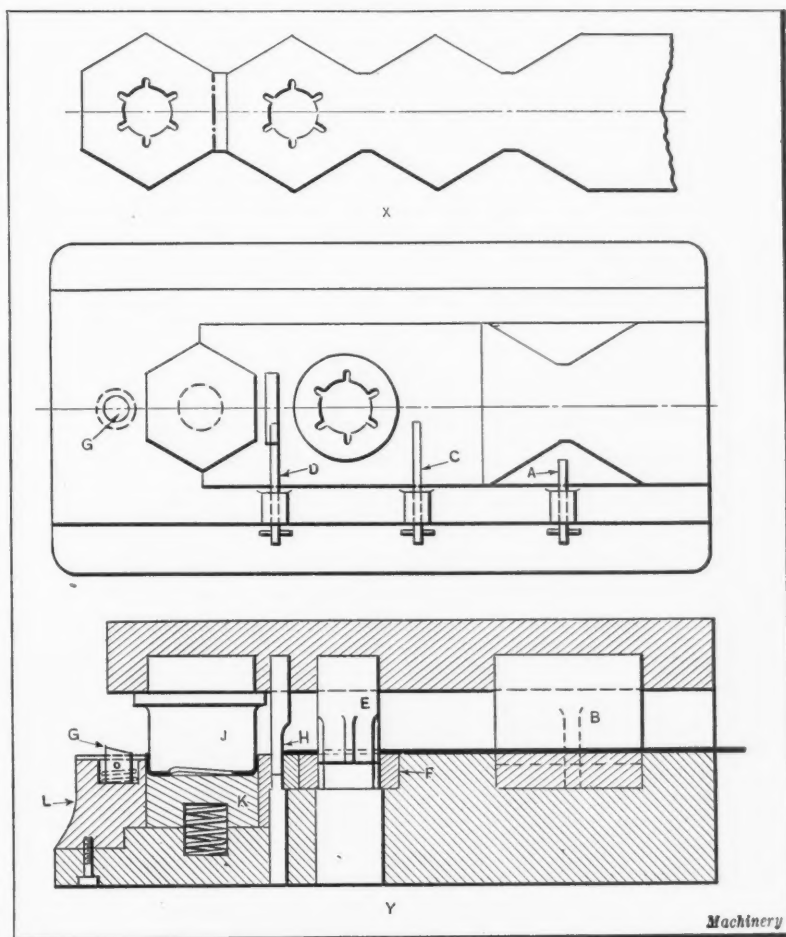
Punch and Die Equipment employed in making a Hexagonal Lock-washer
